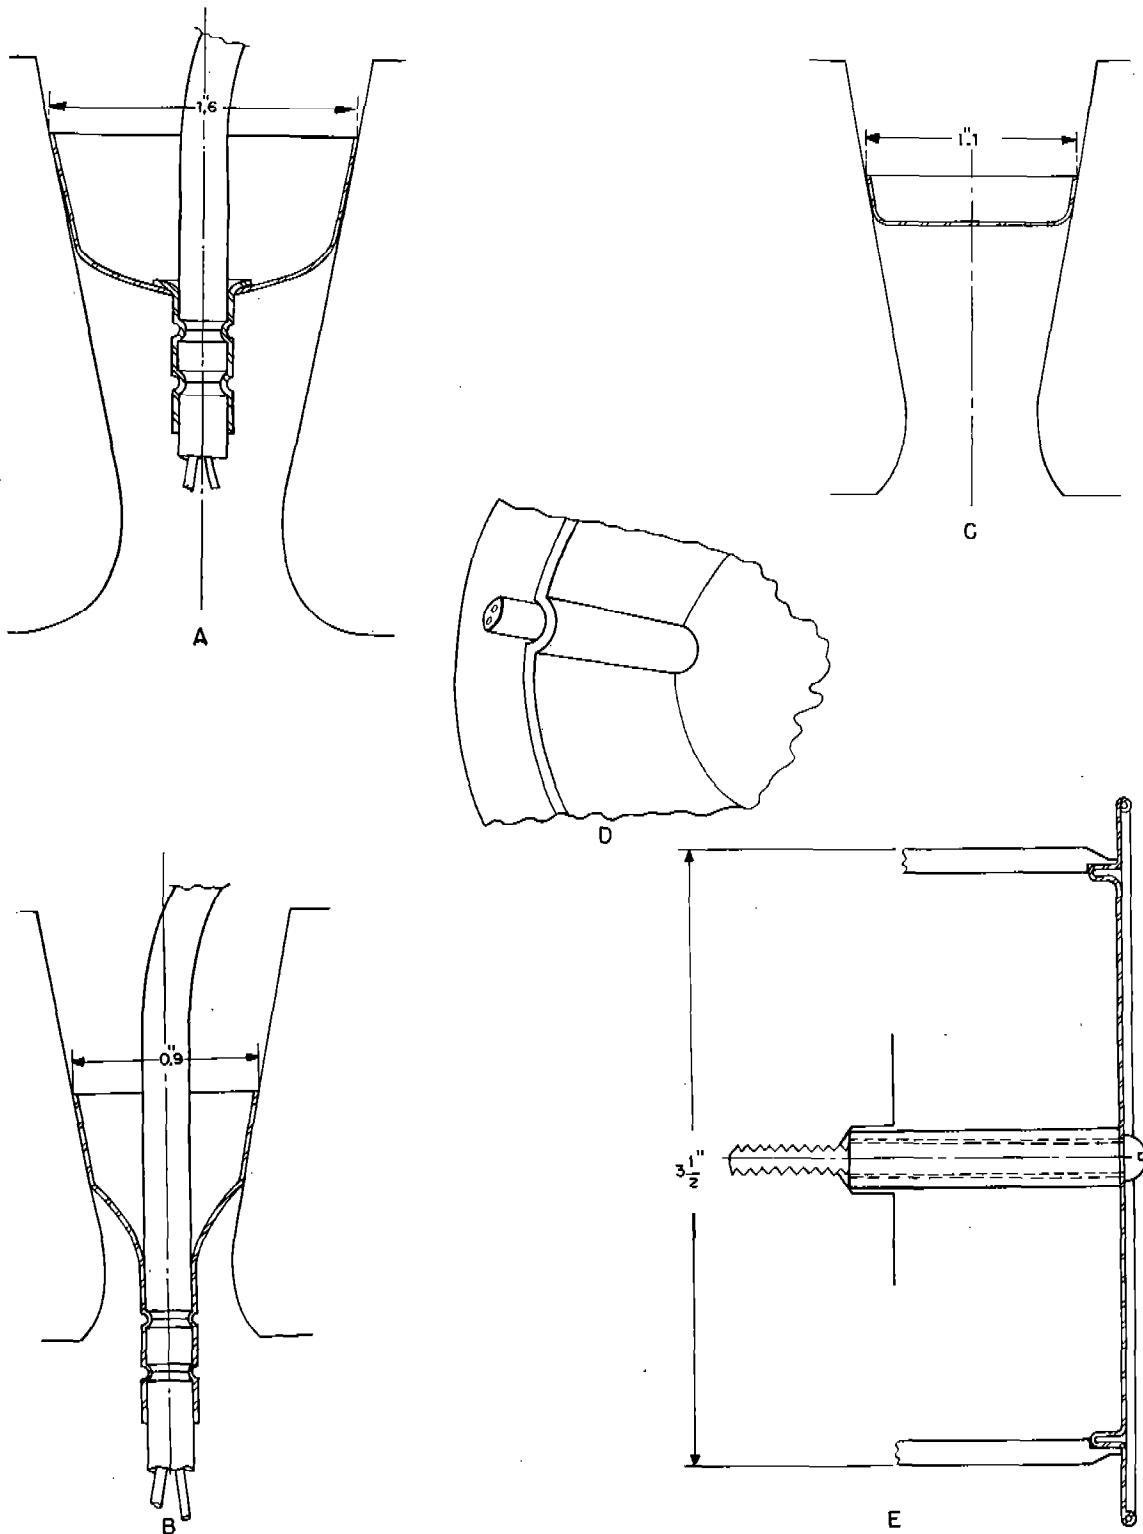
Metal nozzle seals: (A) SCAR; (B) HVAR pigtail seal (for one nozzle); (C) HVAR plain seal (for other 7 nozzles); (D) BR, CWR, and similar motors with electrical contacts on tail use seal similar to (C) but with two wires brought around seal edges at opposite sides as shown; (E) 3.5-in. spinner.
